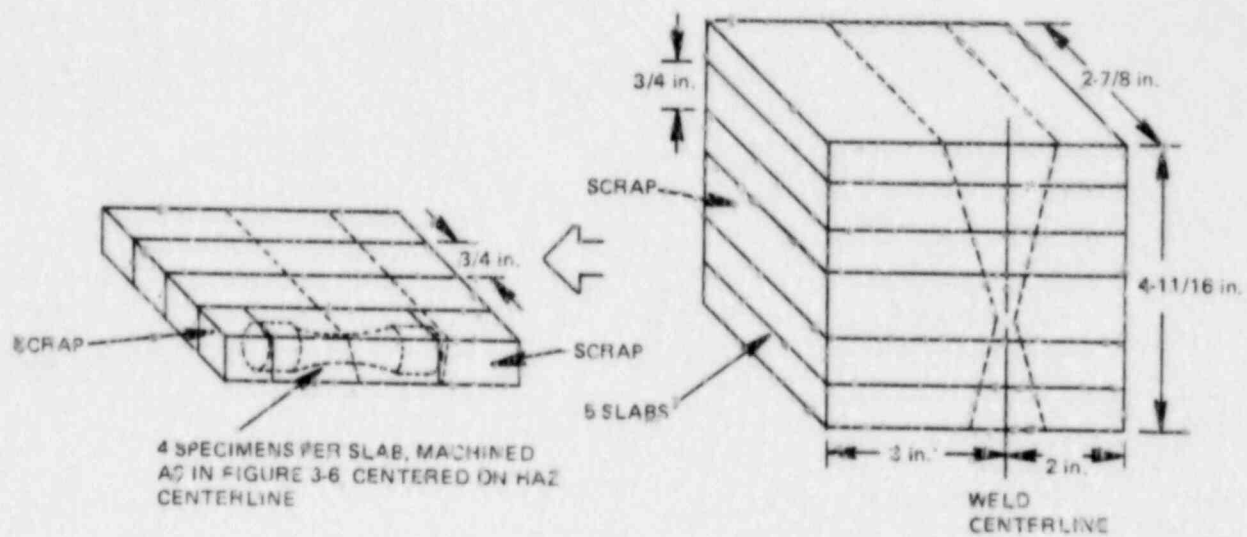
Fabrication Method for HAZ Tensile Specimens
